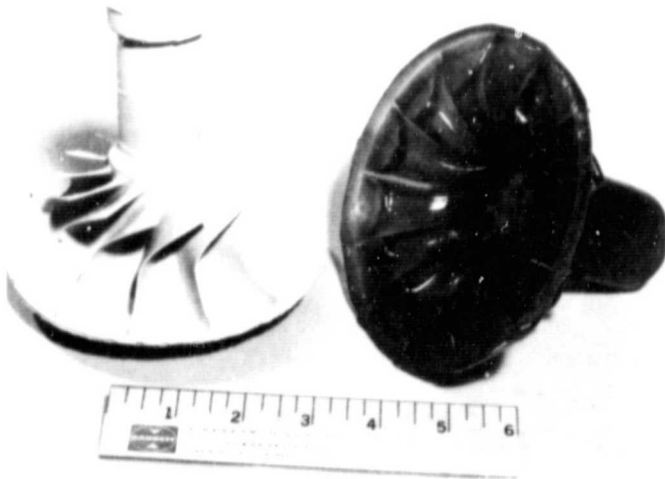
ACC AGT101 Bladed Rotor (left, in green state) and a Casting Shell.
